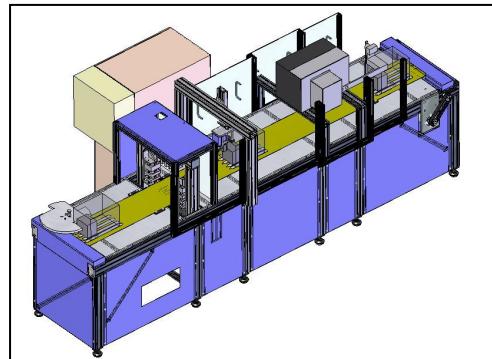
Inspection Machine (courtesy of Crystaloxy)
